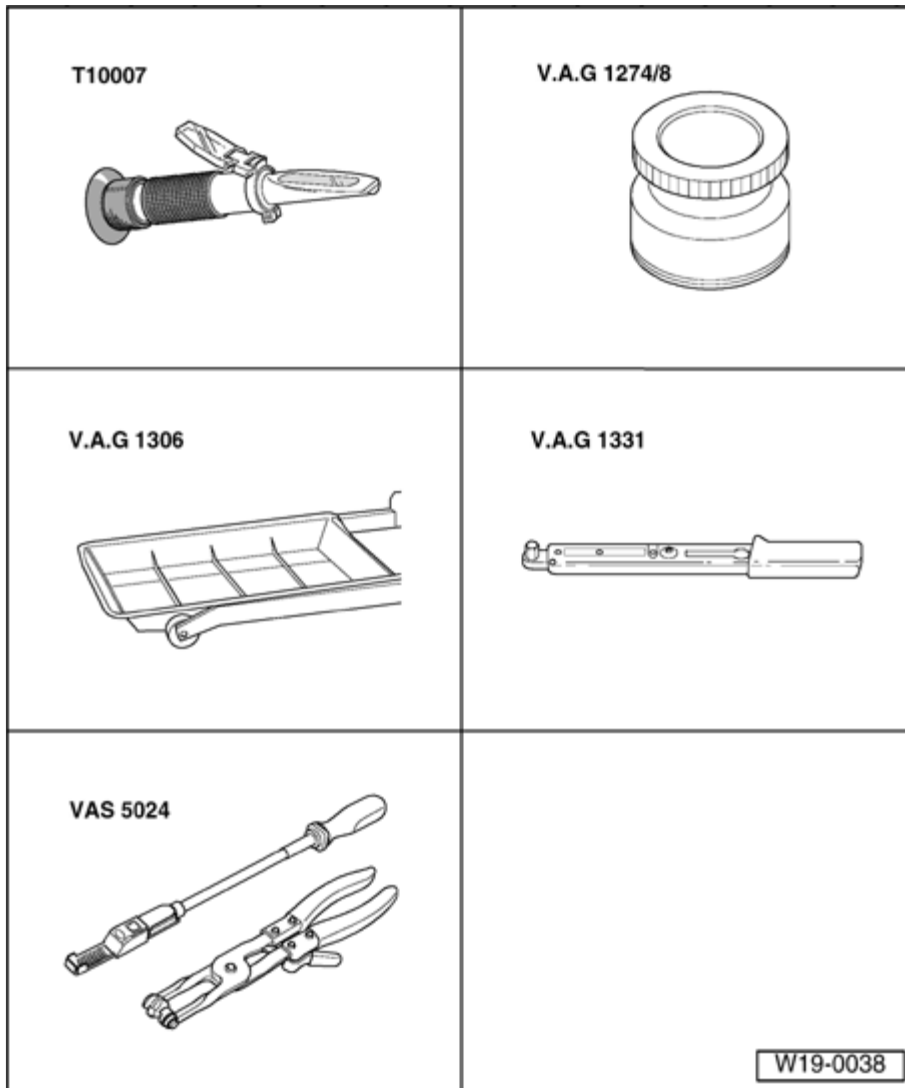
Identifying Special Tools - Cooling System, Draining And Filling
